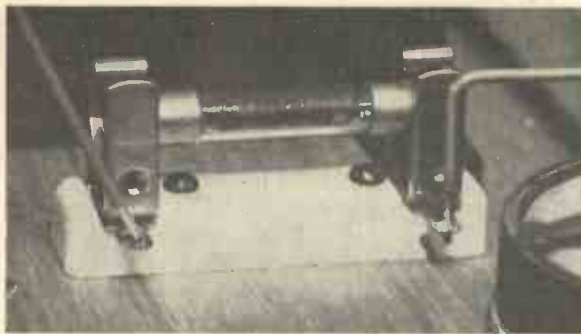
THE WIRING OF A HIGH-RESISTANCE LEAK HOLDER TO SHOW THE SIMPLEST WAY OF SOLDERING WIRES TO TAGS.
